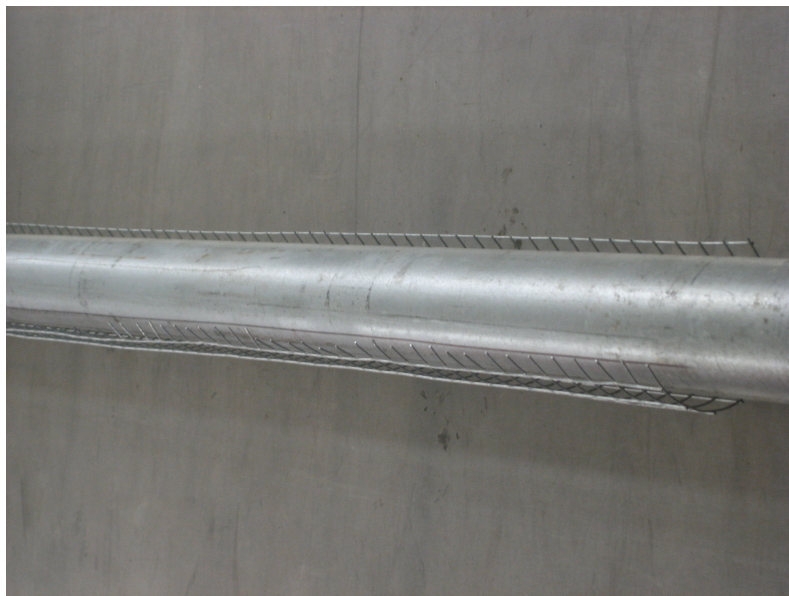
Thermosiphon Manufacturing: Step 2. Wire mesh taking form around the outside of the galvanized pipe it was eventually installed inside of.
